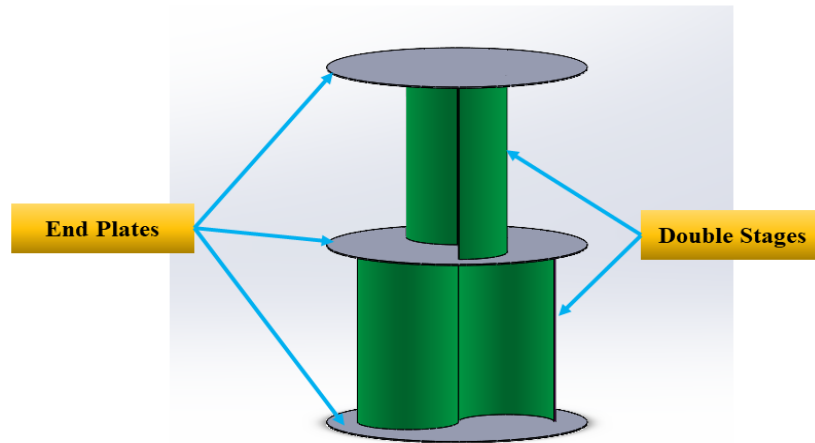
Conventional Savonius turbine with endplate design [12]
